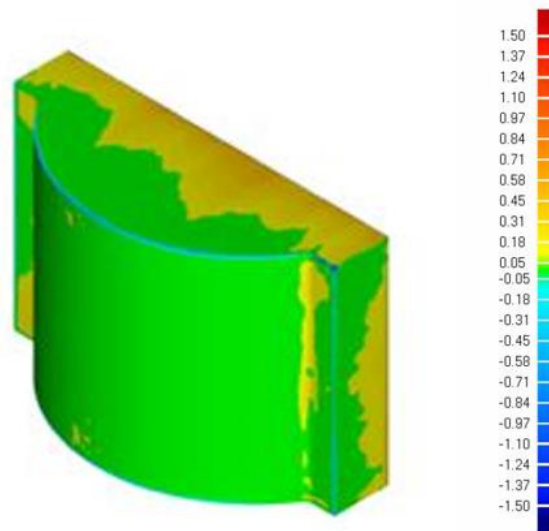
shows a design of a female part of a press tool that was tested at CUT to determine the spring-back of an aluminium plate when pressed between the two halves of the Alumide® tool. The deviation across the surface of the press tool shown in Figure 4.7 was between -0.063 to 0.107 mm.
